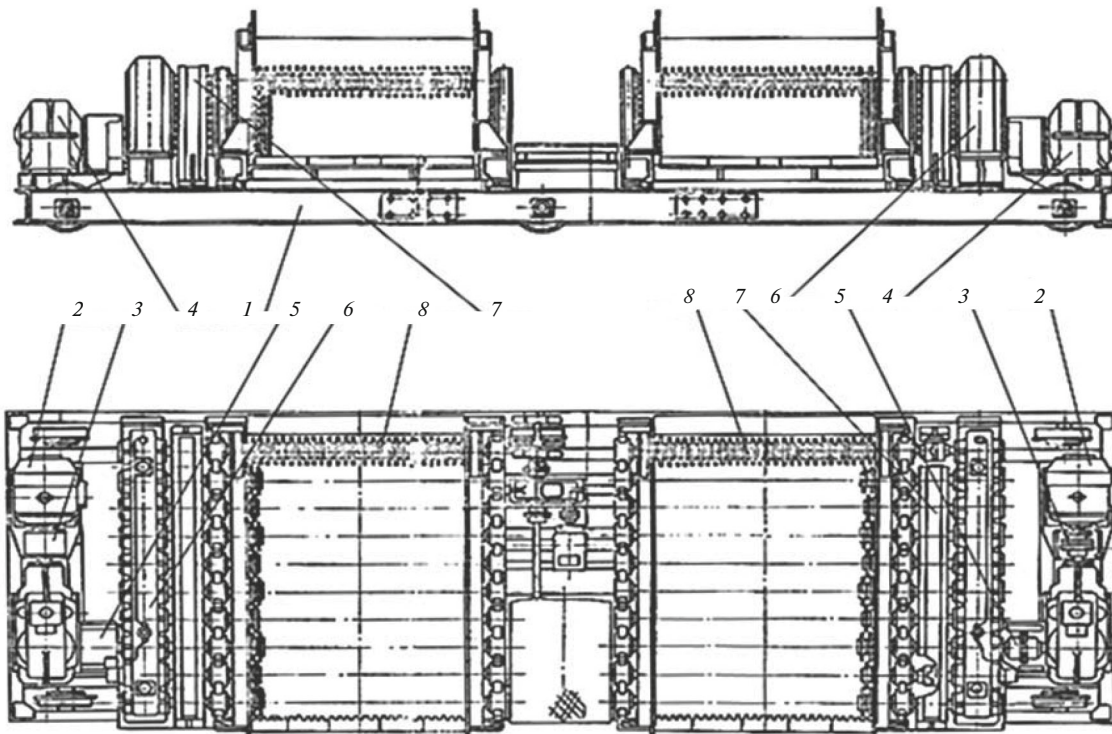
Double ten-roller screen: (1) trolley; (2) electric motor; (3) elastic bush–pin coupling; (4) conical–cylindrical gear system; (5) gear-type coupling; (6) gearbox; (7) equalizing coupling; (8) stands.
